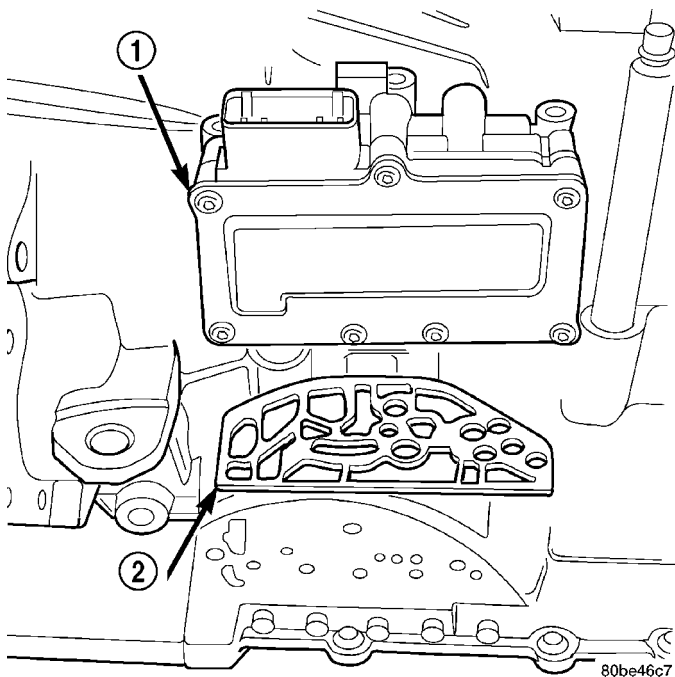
Solenoid/Pressure Switch Assembly and Gasket
